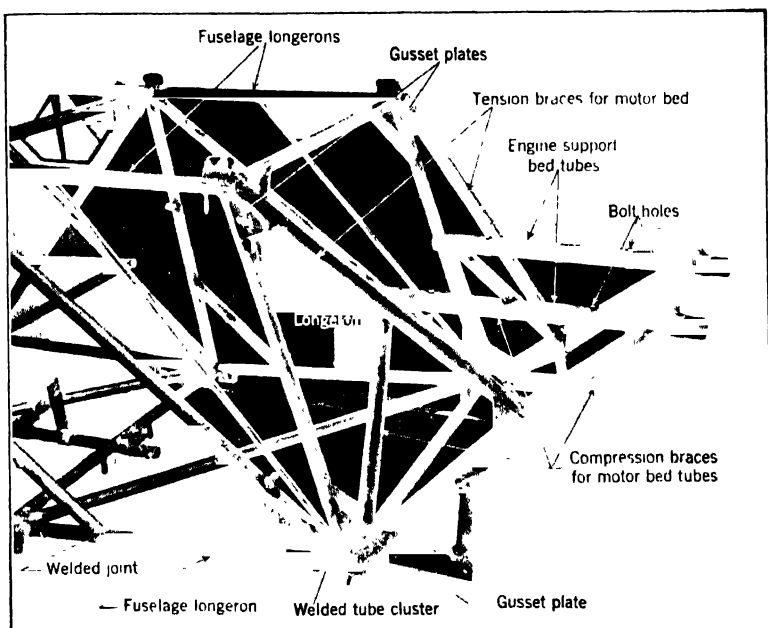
Typical Motor Mount for Curtiss OX5 Motor Made of Braced and Welded Alloy Steel Tubing.
